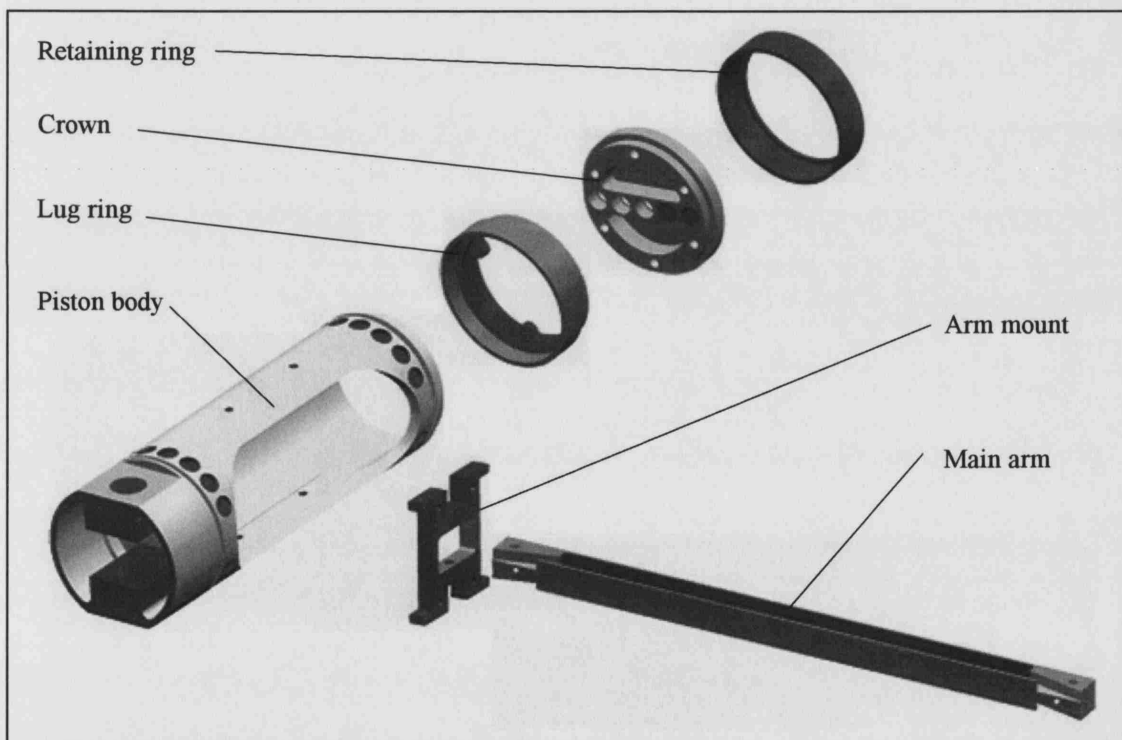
Piston body, lug ring, crown and mechanism mount with main arm
